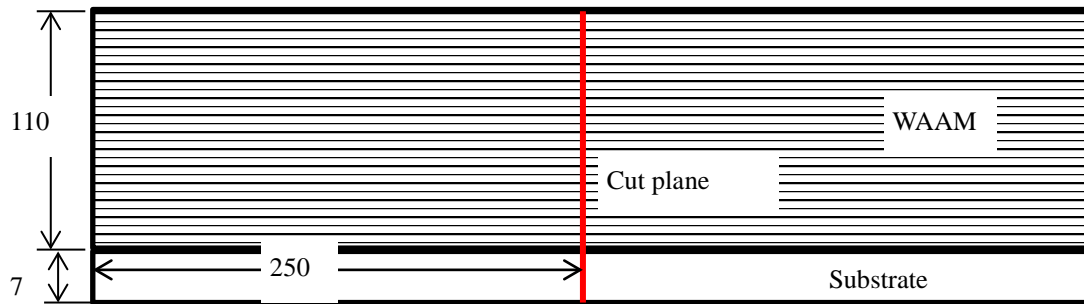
Cut plane in Wall-T110 for contour measurement (unit: mm)
